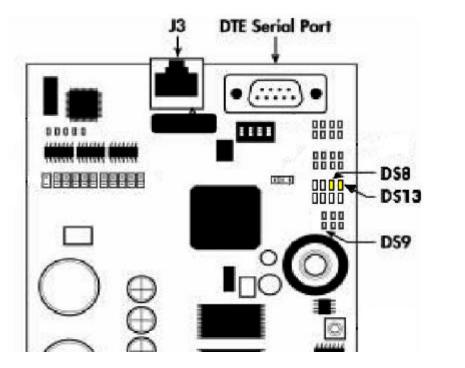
Indication of the LED DS8 and DS13 to be checked in the NIC card PCB.
